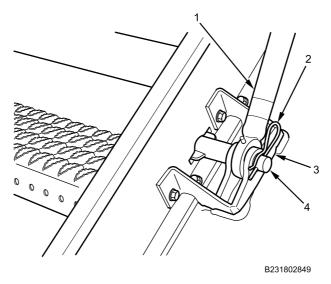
Hydraulic Cylinder Secured with Locking Safety Pin.
